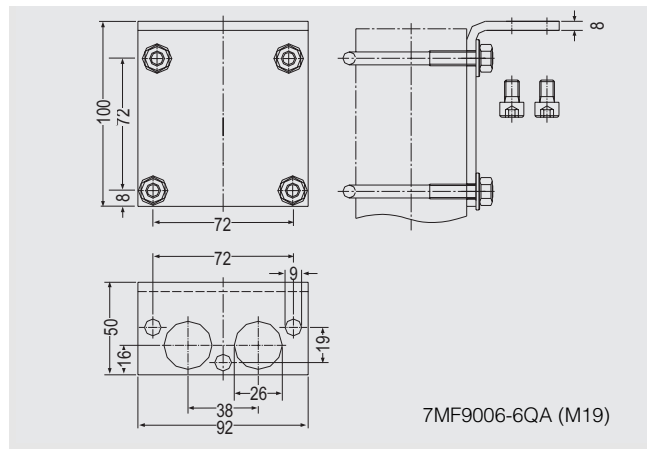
/103 Mount. bracket for three/five-spindle valve manifolds, dimen.
